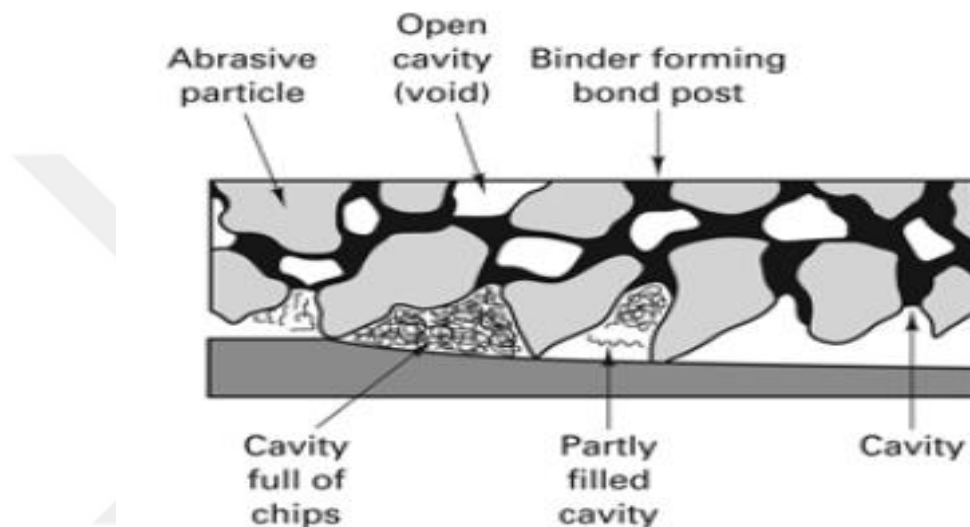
Filled Cavity of a Bonded Grinding Wheel
